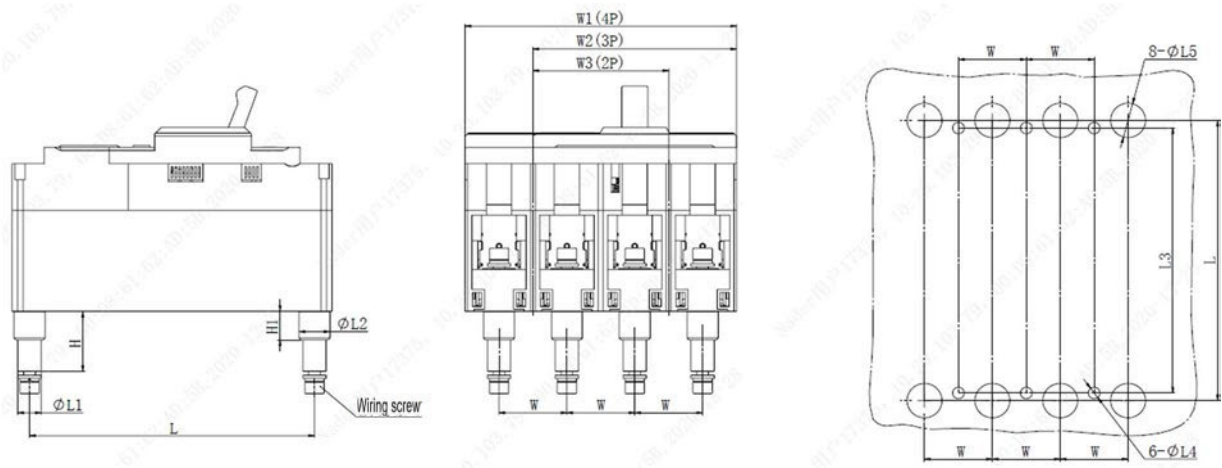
2P、3P、4P outline dimension drawing of rear wiring board
